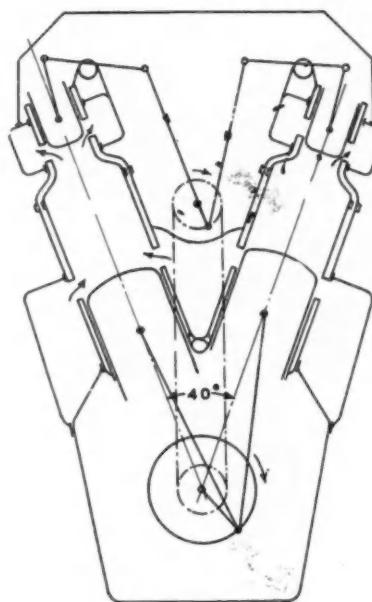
Two-stroke engine in V-form with exhaust piston slide-valve.
